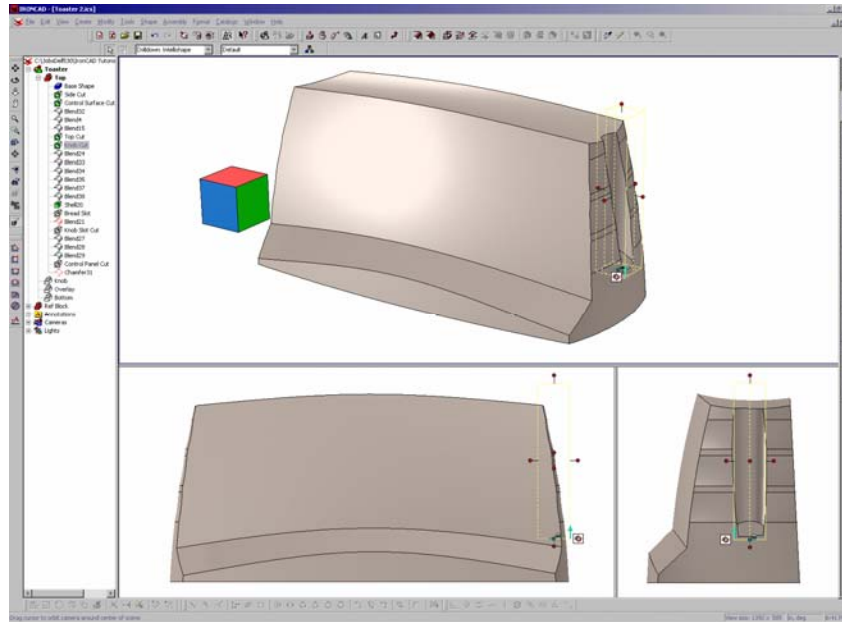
Top Surface shown with Loft Cut in Perspective, Front, and Side Views
